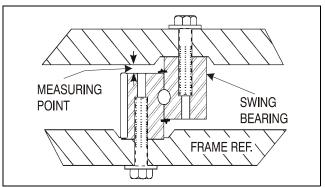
Swing Bearing Tolerance Measuring Point
